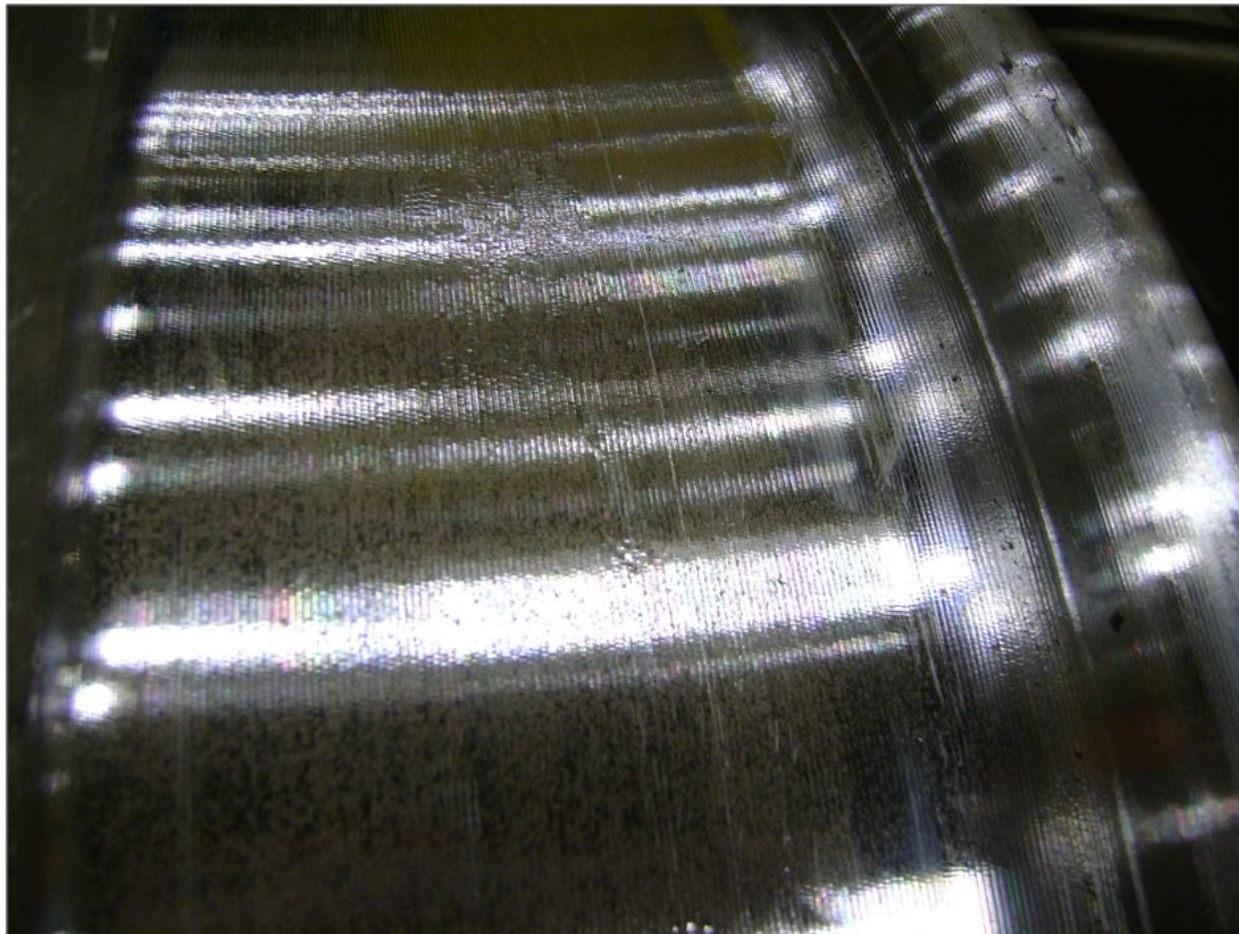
Rough Wheel Surface from Milling Type Truing Machine
